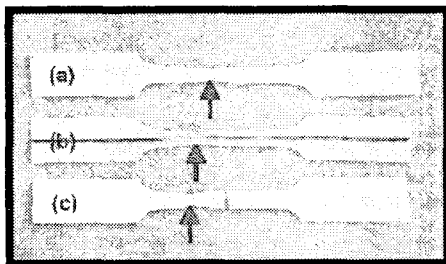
Tensile test specimens ; (a) substrate metal specimen (b) welded specimen (parallel to strain direction) (c) welded specimen (perpendicular to strain direction)
